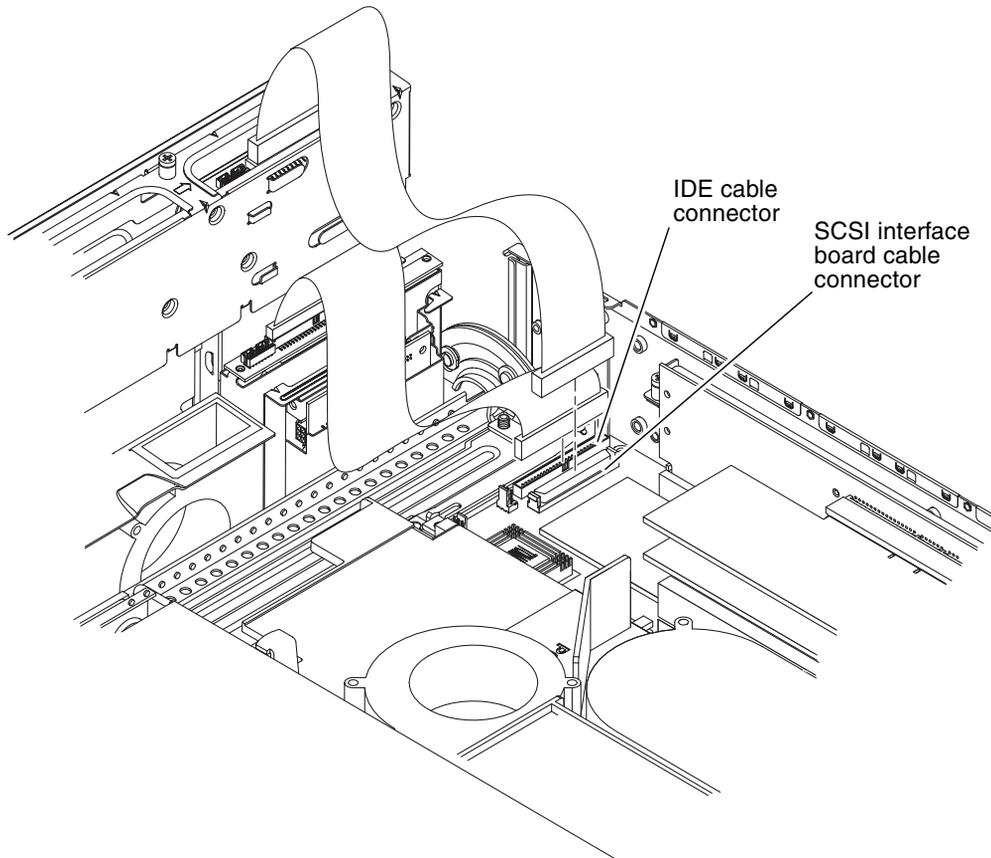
Removing the SCSI Interface Board Cable and the IDE Cable From the System Board
